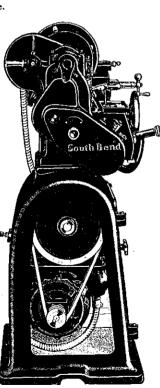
End view of lathe with end plate removed to show multiple "V" belt drive from motor
